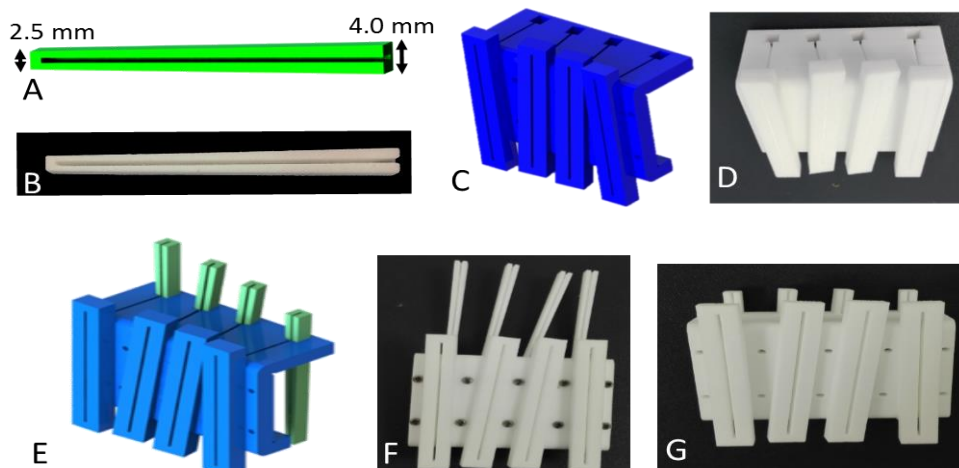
A) CAD model the back sleeve of design “backguidance 1”. B) 3D printed model of back sleeve of design “backguidance 1”. C) CAD model of the major part of the template. D) 3D printed model of the major part of the template. E) The assembled CAD model. F) G) The assembled 3D model.
